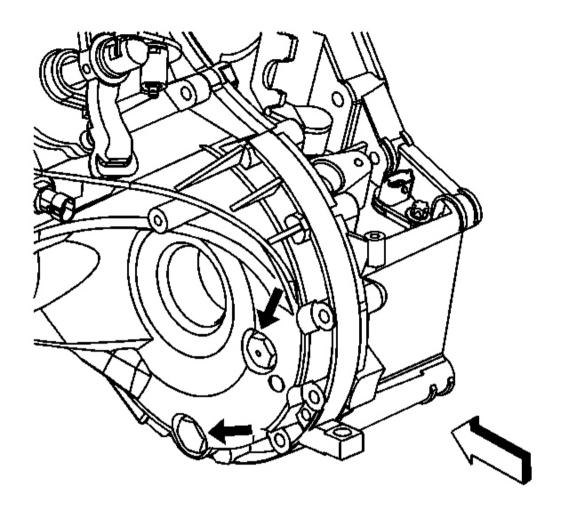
Transaxle Mount Courtesy of GENERAL MOTORS CORP.
